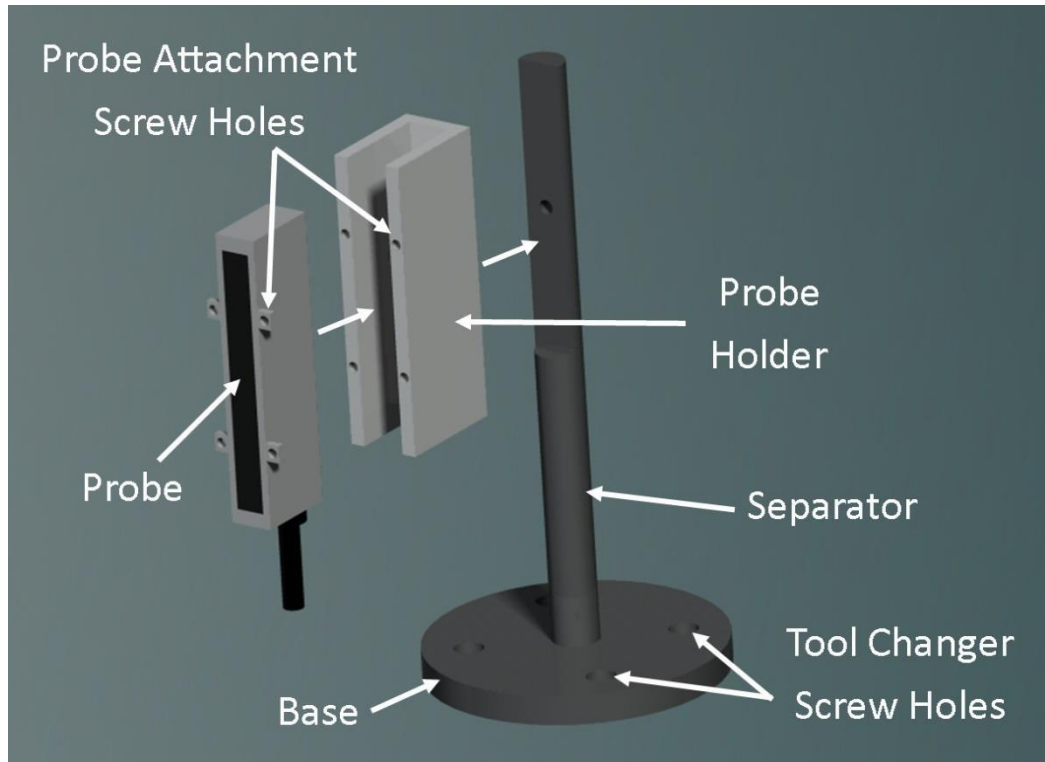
Exploded view of probe mount and the probe. The unlabelled white lines illustrate how the three parts come together.
